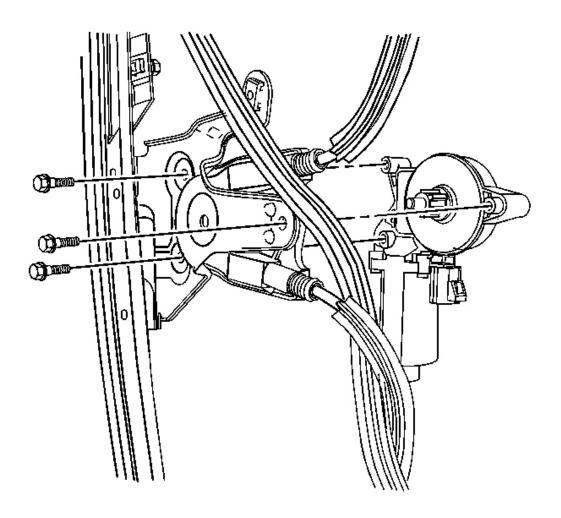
Locating Window Regulator Motor Bolts Courtesy of GENERAL MOTORS CORP.
